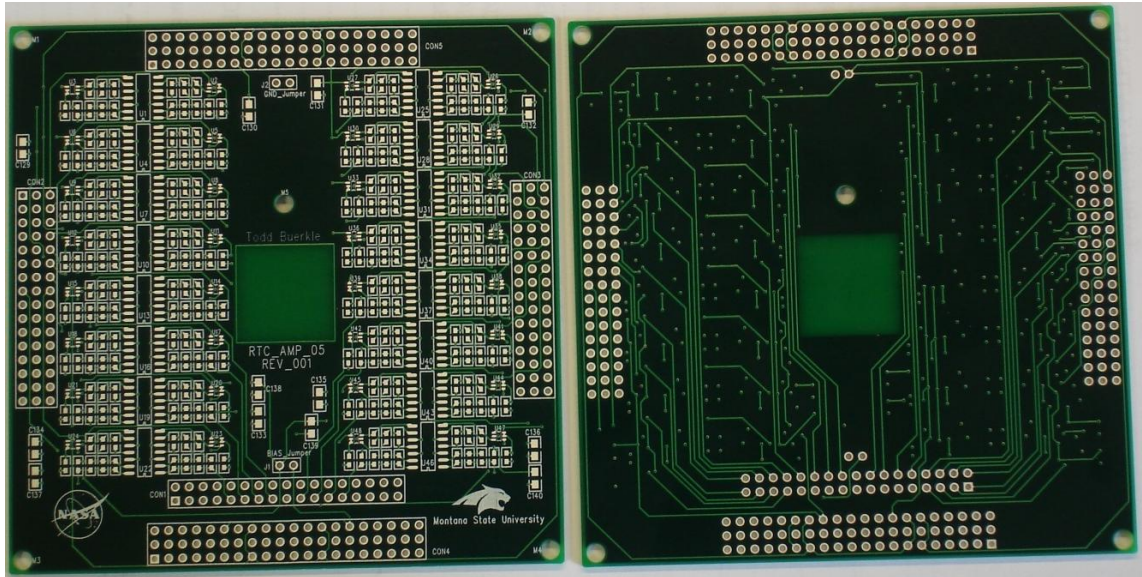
Picture showing the front and back side of the fabrication amplifier board. These boards are 4 inches by 4 inches.
